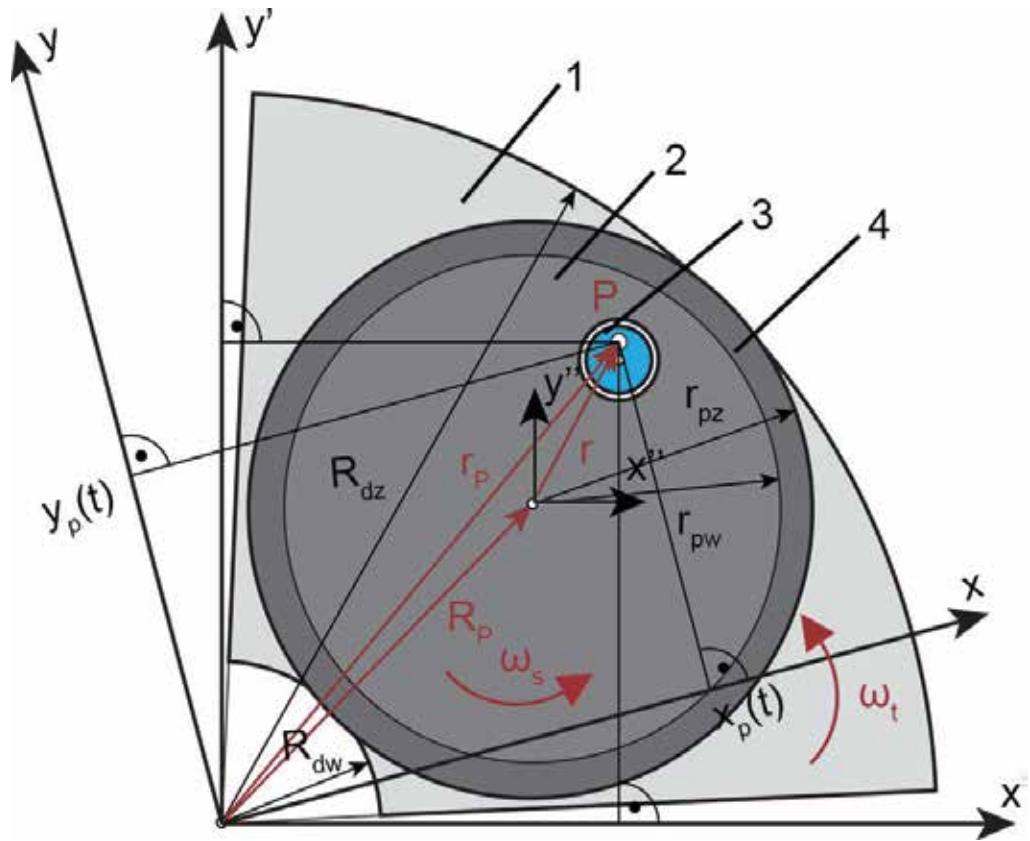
Kinematic diagram of single-sided lapping machine: (1) lapping plate, (2) separator, (3) workpiece, (4) conditioning ring.
